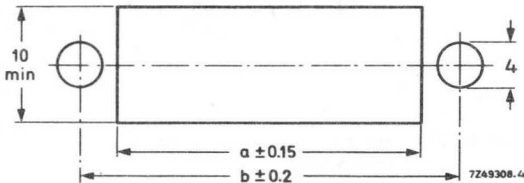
Hole configuration for panel mounting, for dimensions a and b see Table 2
